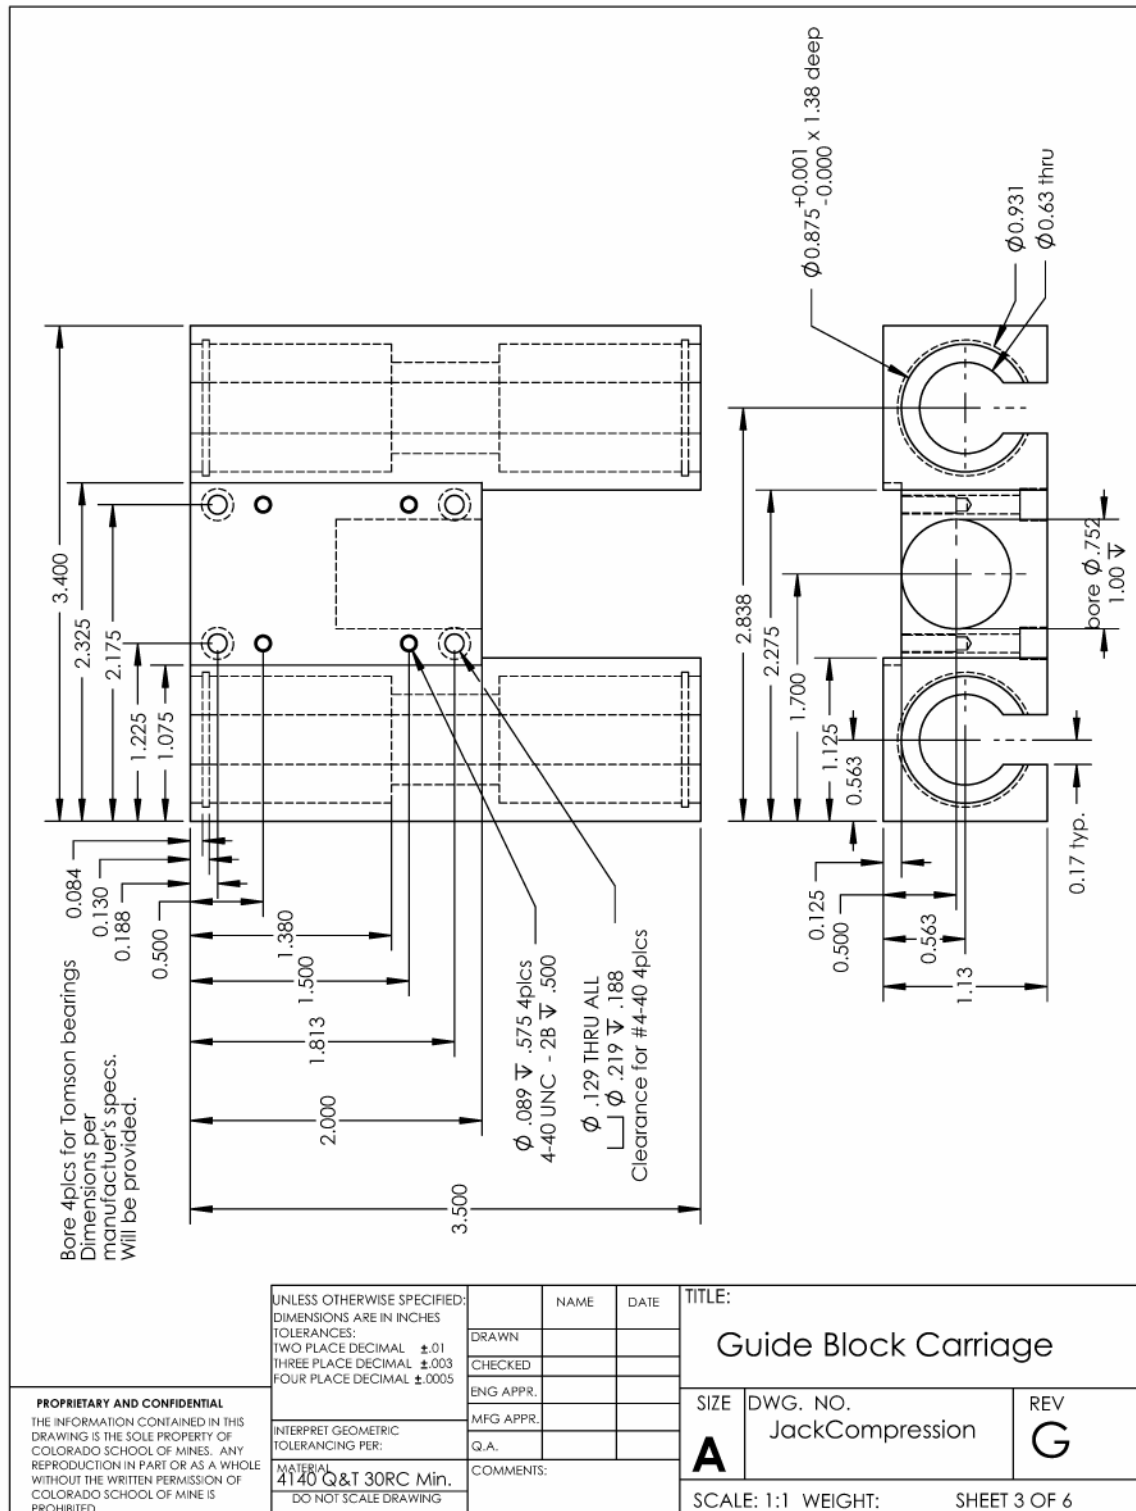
Shop drawing of guide block carriage, also know as the crosshead. Contains linear bearings and travels across the guide rails linear shafts. It also contains the second grips.
